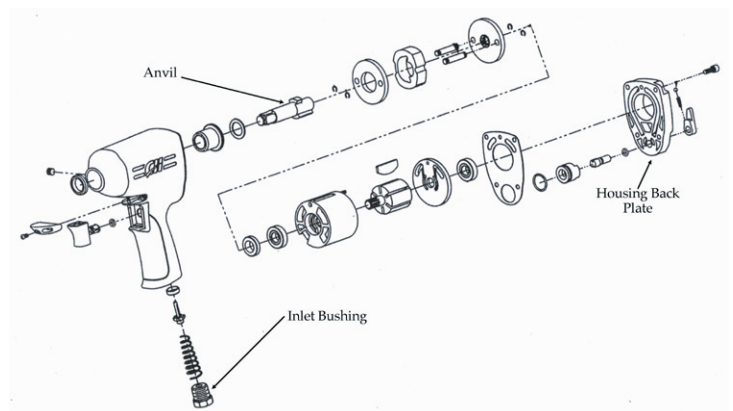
Exploded View of Campbell Hausfeld 1/2" Air Impact Wrench.
